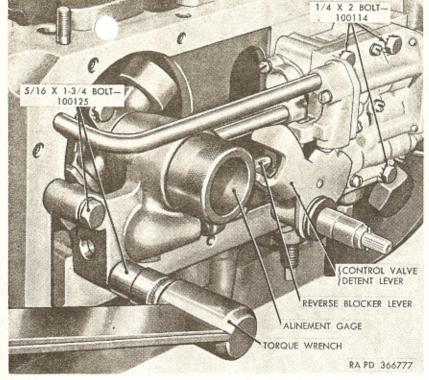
Alining reverse blocker bracket to governor using gage— A7950087.
